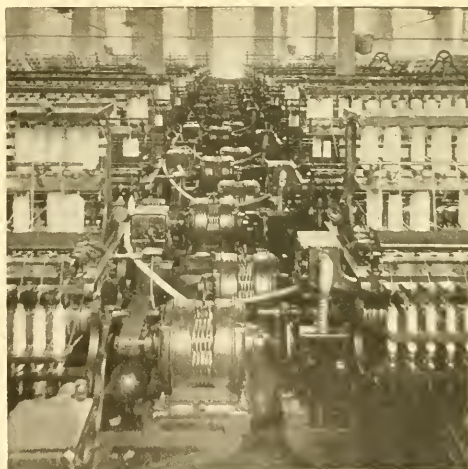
SPINNING FRAMES FORMERLY DRIVEN BY BELTS FROM OVER-HEAD SHAFTING
